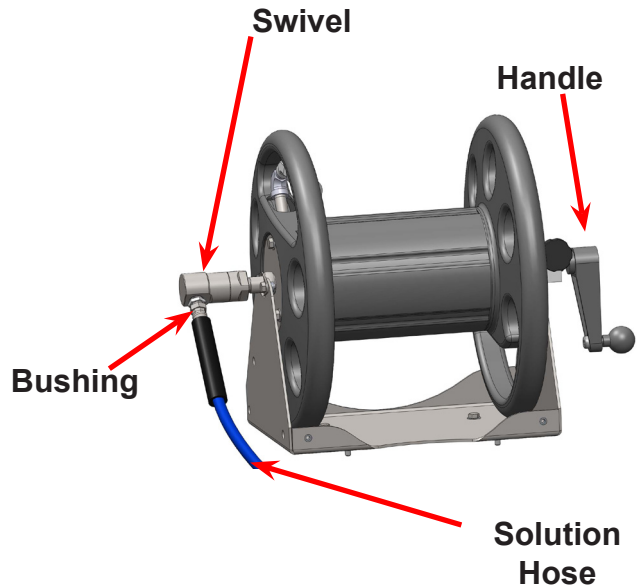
Attach Swivel, Bushing and Handle onto Hose Reel
